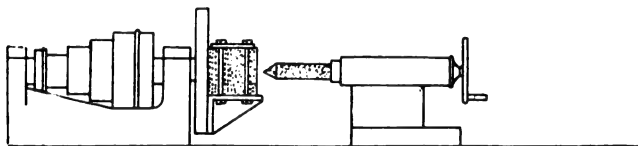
Drilling a piece of work attached to a face plate on the headstock mandrel.
